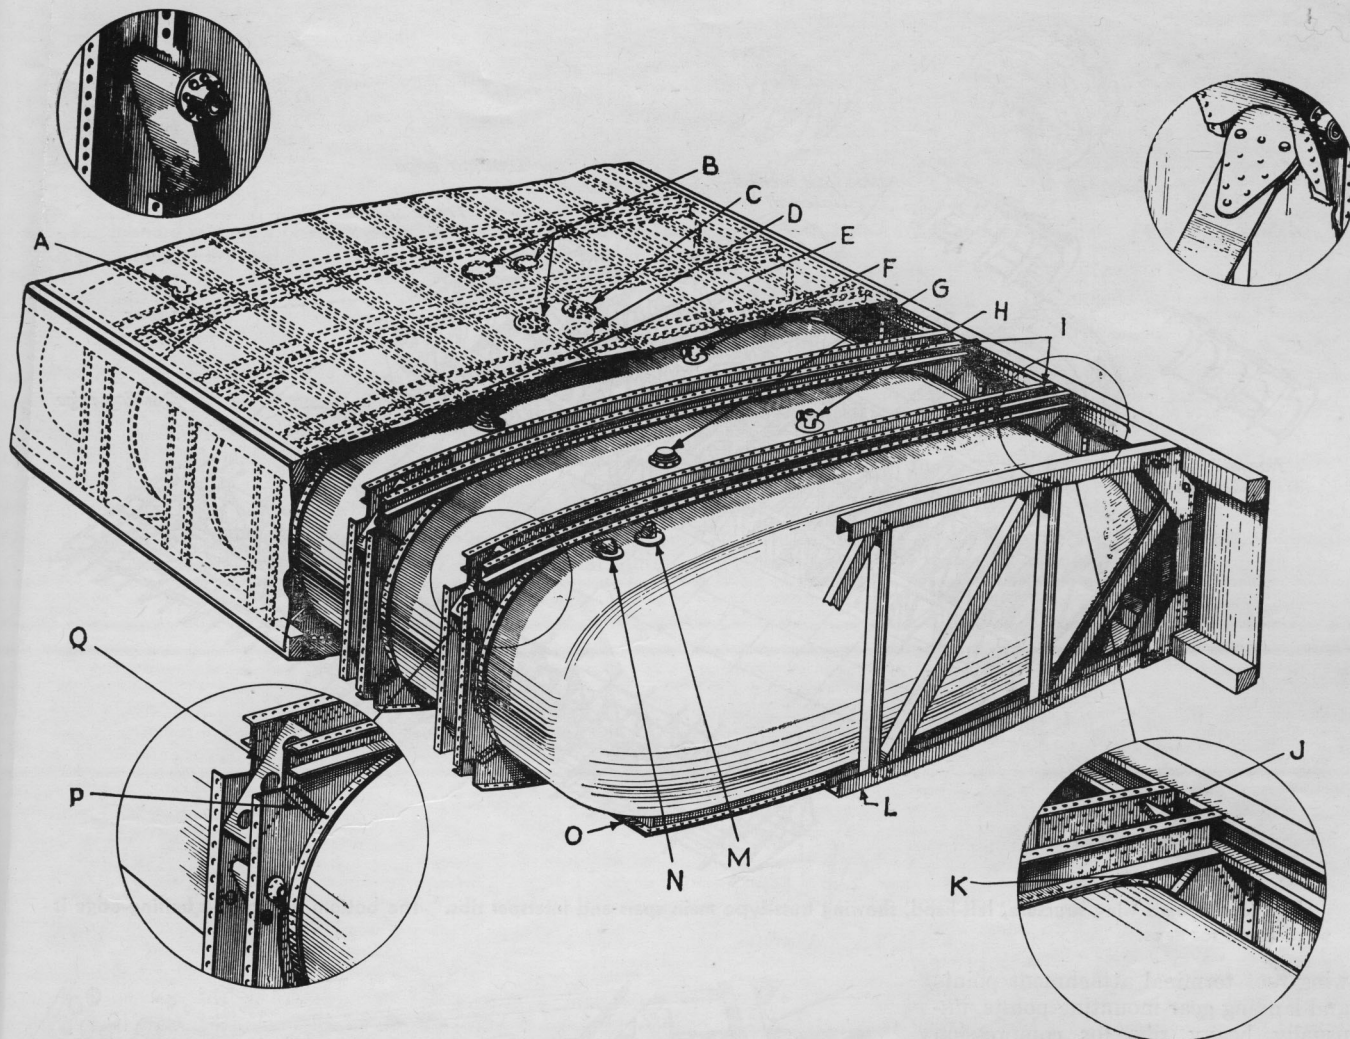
Cutaway view shows the method of mounting the Lancaster inboard wing fuel tank, with refueling connection (A); inspection doors in tank (B); jettison adapter (C); air valve (D); filler cap (E); fuel pump (F); fuel gauge (G); pump (H); tank bearers (I)—also shown enlarged in the circle at the lower right with diaphragm at (J) and stiffening angle at (K)—inboard engine rib (L); air vent (M); refueling connection (N); and tank access door (O). The circled sketch at the lower left is an enlarged view of a tank rib at the front spar, with stiffening angle shown at (P) and diaphragm at (Q). The circled sketches at the upper left and right depict, respectively, the tank strap attachment on the tank rib at the front and rear spars.
